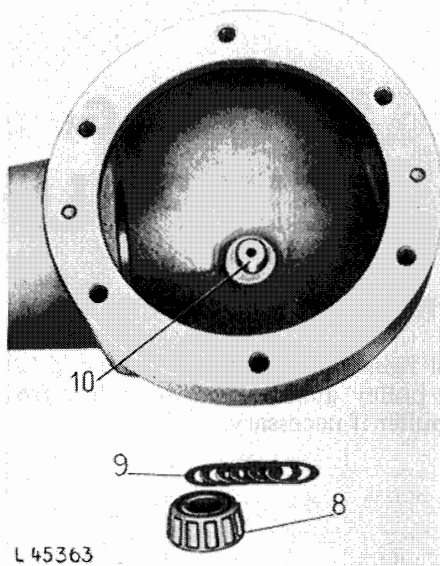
Removing Bearing Cone and Shims from Inner Bearing Pin
